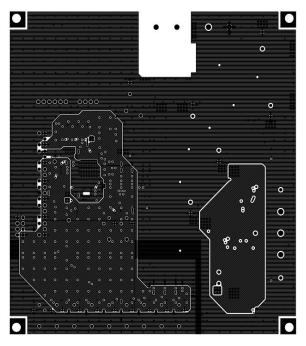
2nd layer of PCB for Hall Sensor Driver
